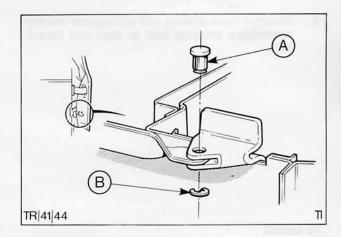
Check arm clevis pin and retainer A - Clevis pin B - Circlip
